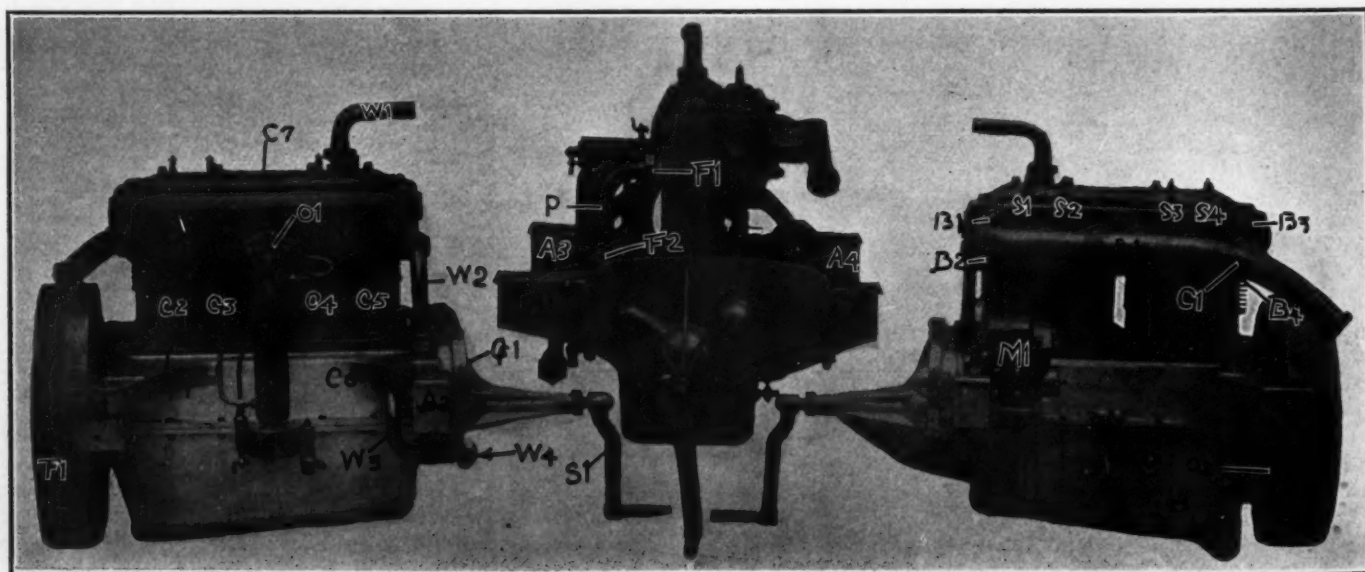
Carbureter side of the motor Fig. 2—Front elevation in slight perspective Fig. 3—Magneto side of the motor
